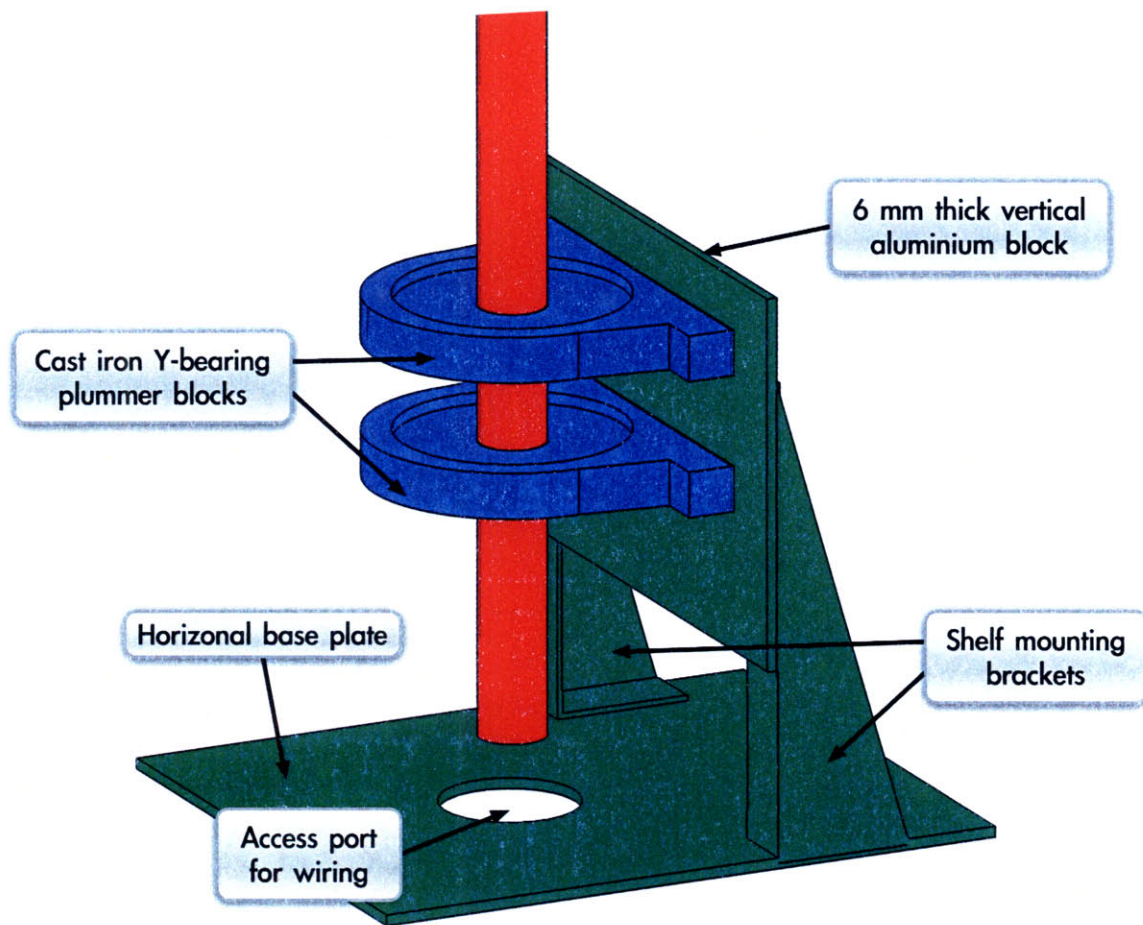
Lower part of centrifuge without motor (CAD: Kendra Toole)
